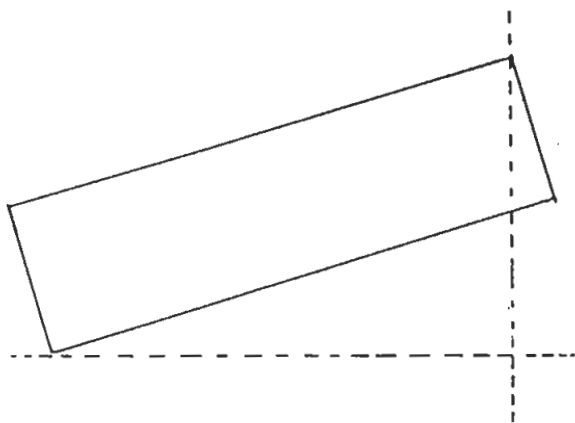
D. Miterer Takes More From Bottom When Rule Is Raised with Cardboard
